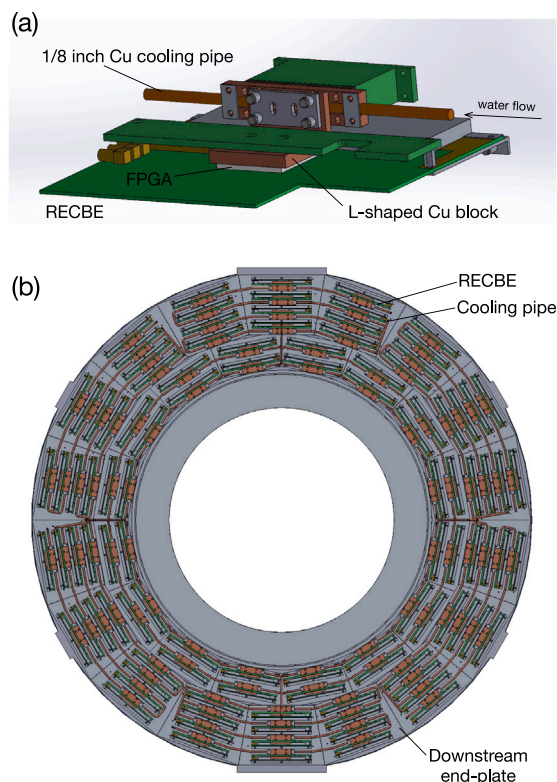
The design of cooling pipes and parts on the CDC end-plate.
